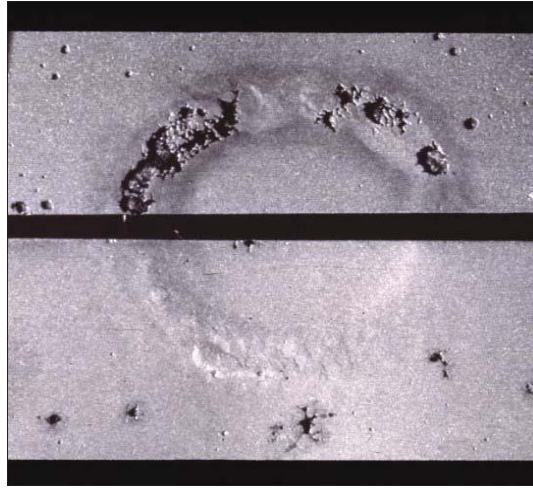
Comparative corrosion resistance of the weld zone in a low alloy steel test sample containing a circular weld bead on the opposite side of the sample [59].
